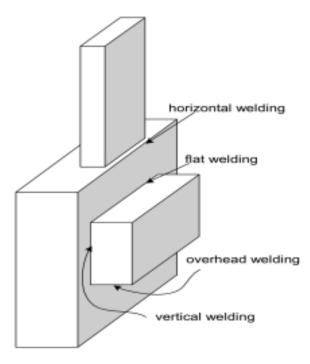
Scheme of placement of components to be welded for vertical welding
